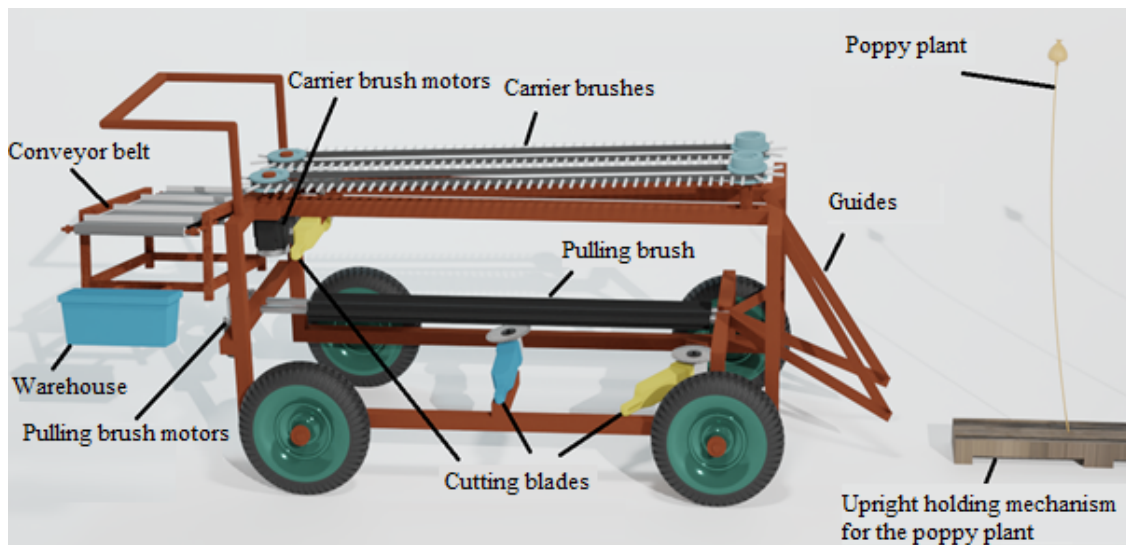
Solid model side view of the prototype poppy harvesting machine showing the carrier and pulling brush systems, cutting blades, and conveying mechanism.
